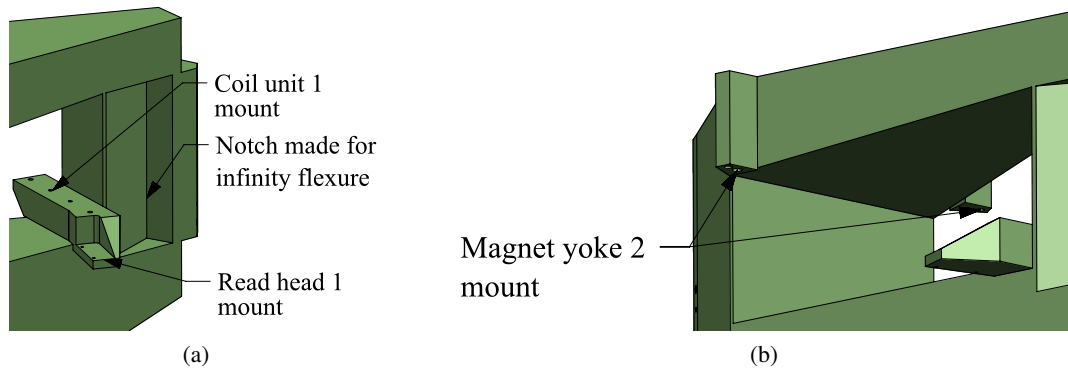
Arm 1 interfaces: (a) infinity flexure notch and coil unit 1 and read head 1 mount, (b) magnet yoke 2 mount
